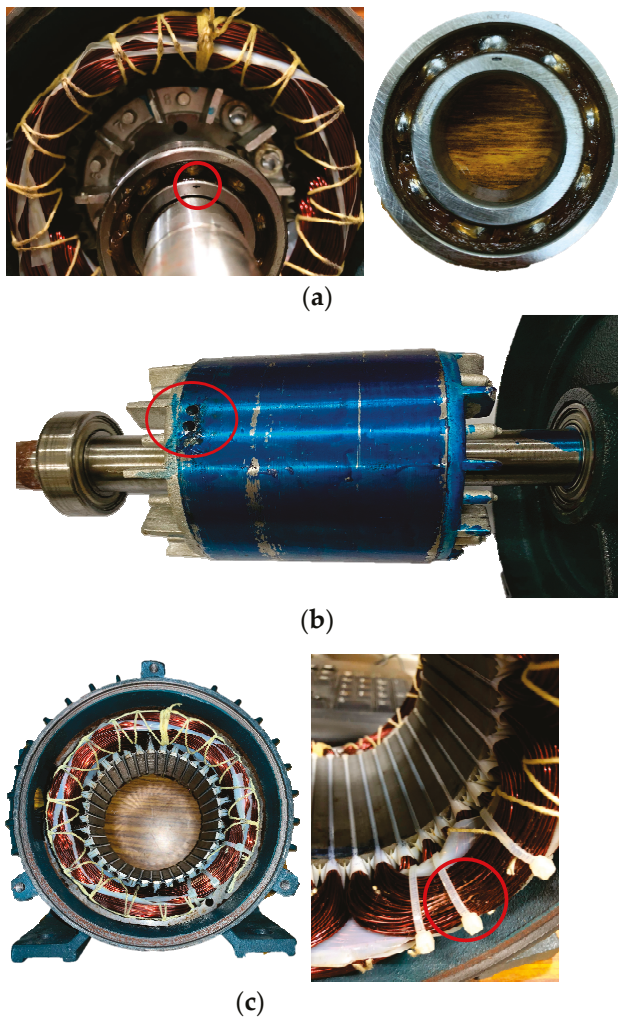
(a) Bearing damage processing (aperture 1.96 mm × 0.53 mm). (b) Rotor drilling failure (two holes ϕ 8 mm depth 10 mm). (c) Short circuit between stator layers (two coils short circuit).
